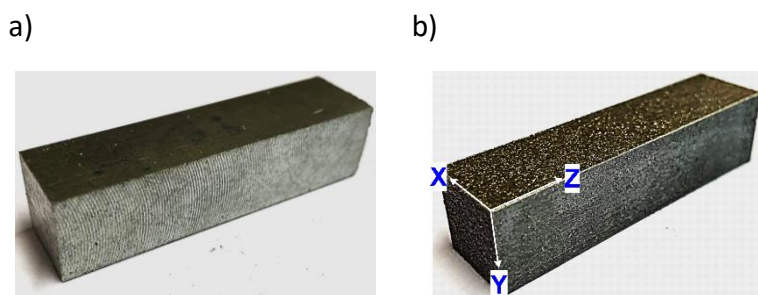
Schematic illustration of the test specimens a) cast (after machining), b) SLM (as printed).
